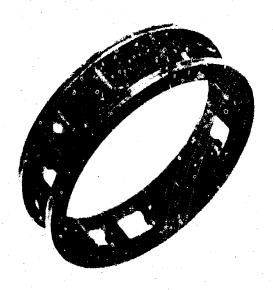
Test Bearing K 32 Retainer and Rollers after Test E-48
